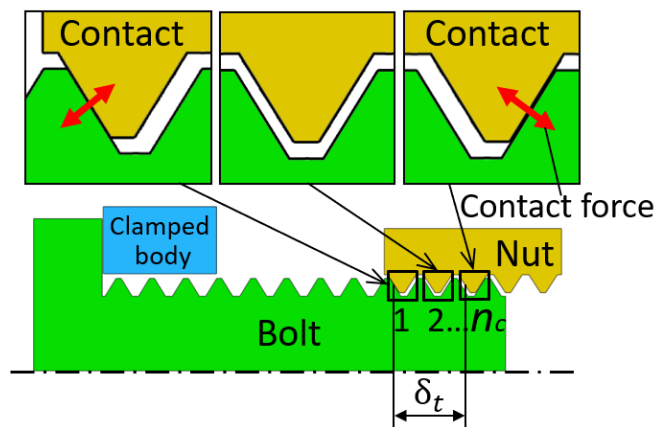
Contact status when the prevailing torque appears between bolt and nut.
